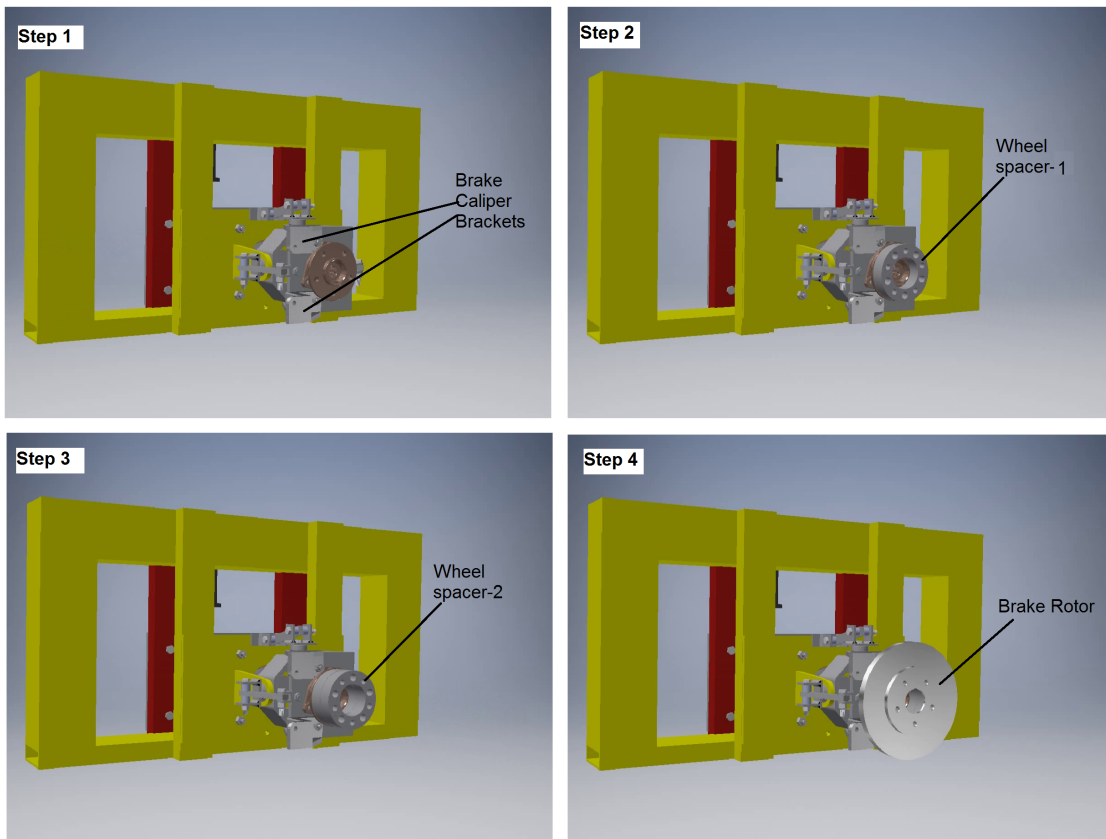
Procedure for brake system assembly - Step1 to Step4.
